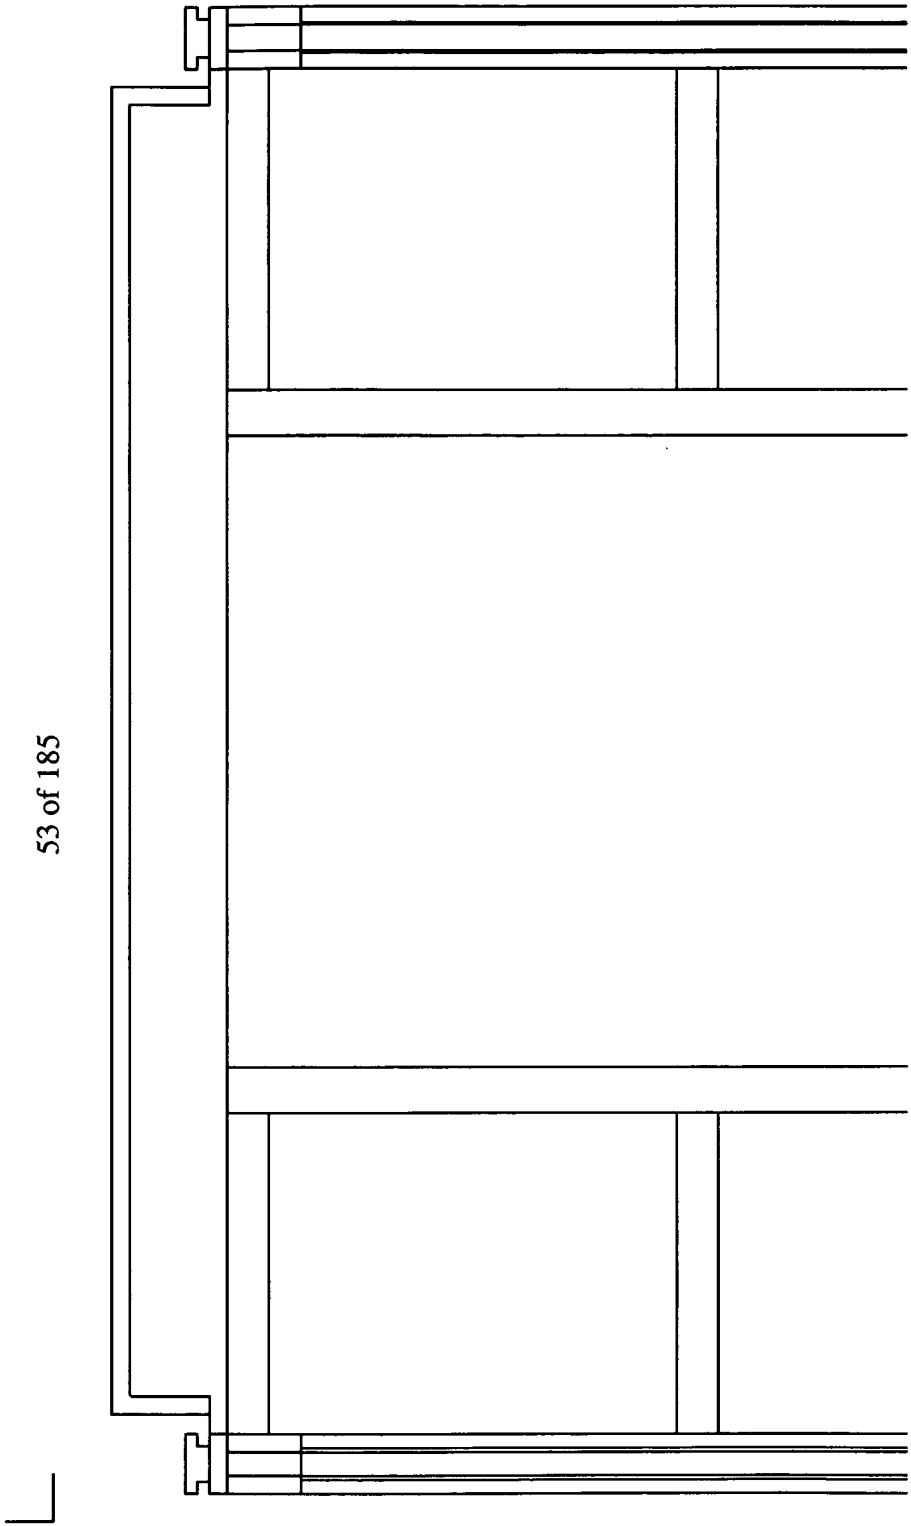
B: Top view of the left end of a floor frame (40 foot high cube collapsible cargo container)
